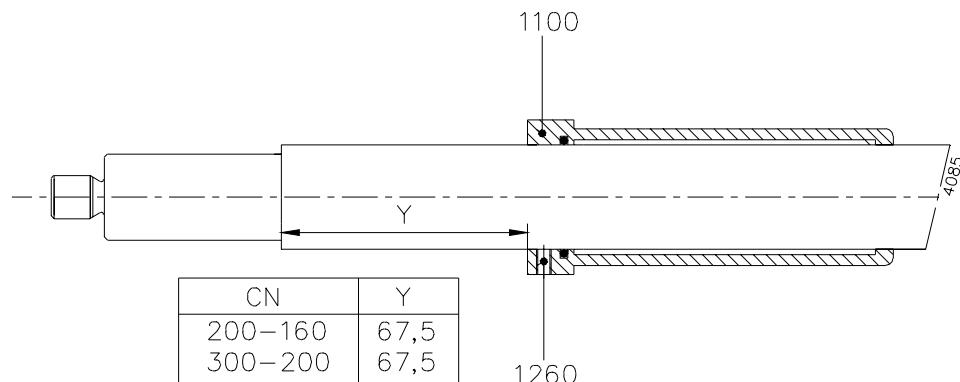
Adjusting shaft sleeve of CN 200-160 and CN 300-200
